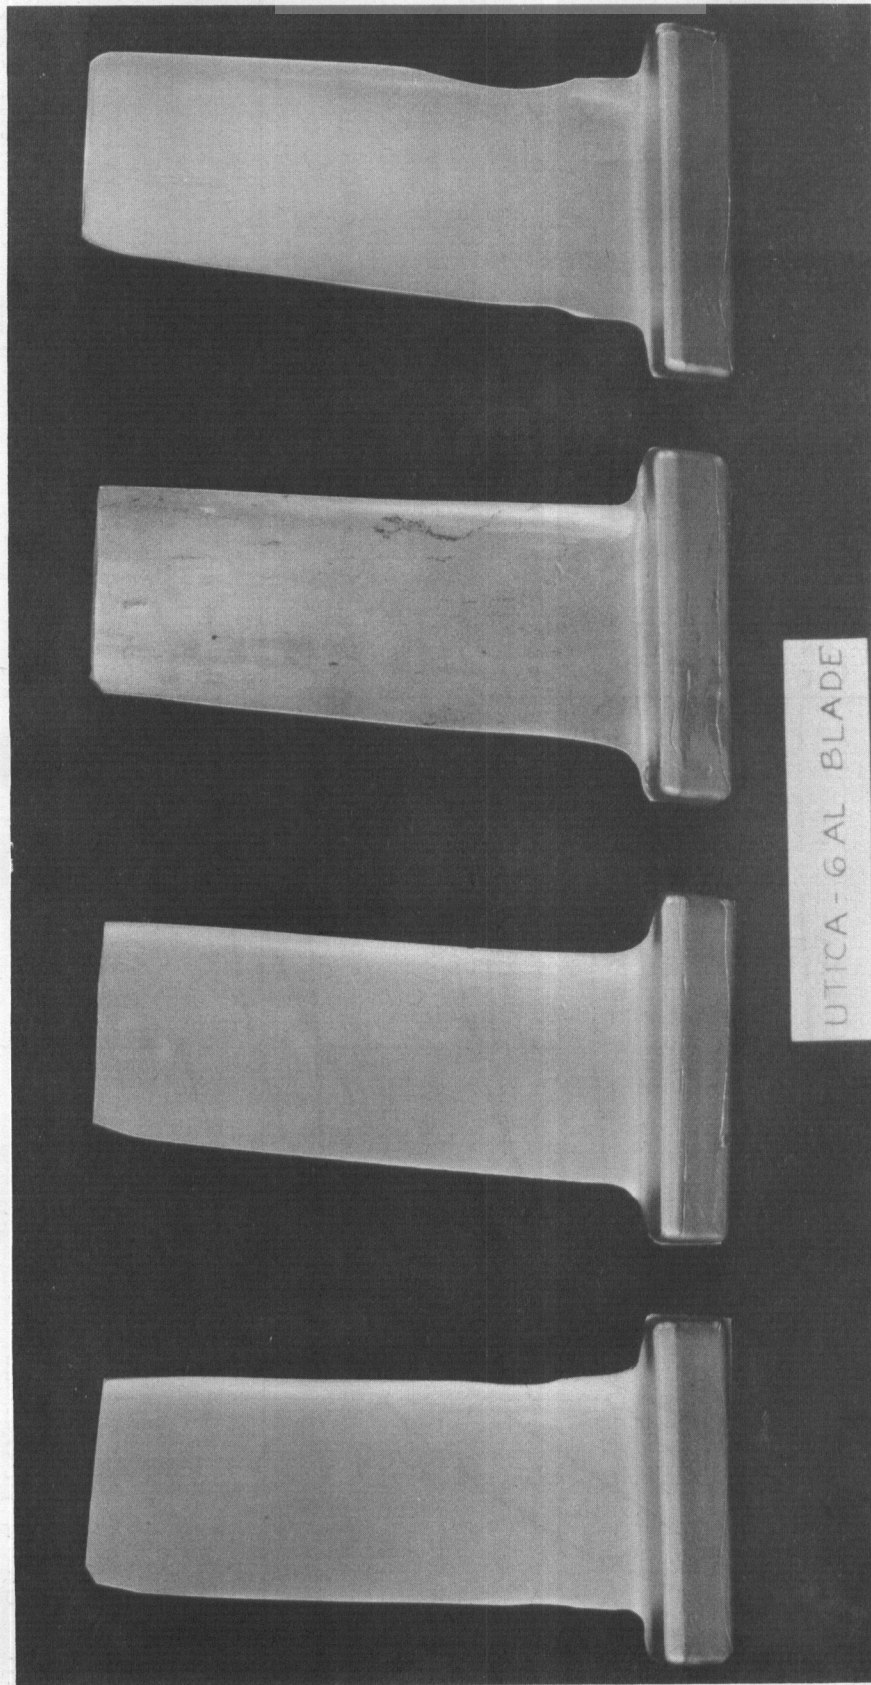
COMPRESSOR BLADES FORGED AT 1500°F SHOWING CRACKS AT EDGES, INCOMPLETE FILLING OF DIES, LAPS AT ROOT, AND MATERIAL INHOMOGENEITY
